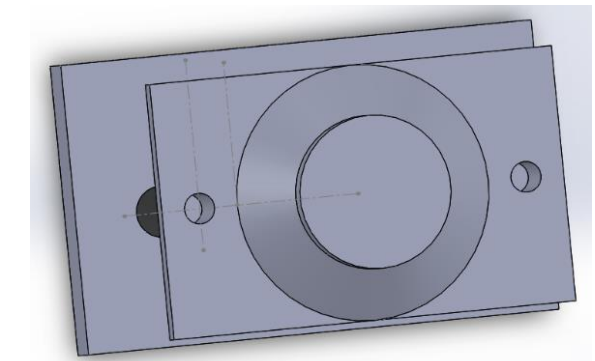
(c) - Assembly of rubber key in PCB holes (Top view).
